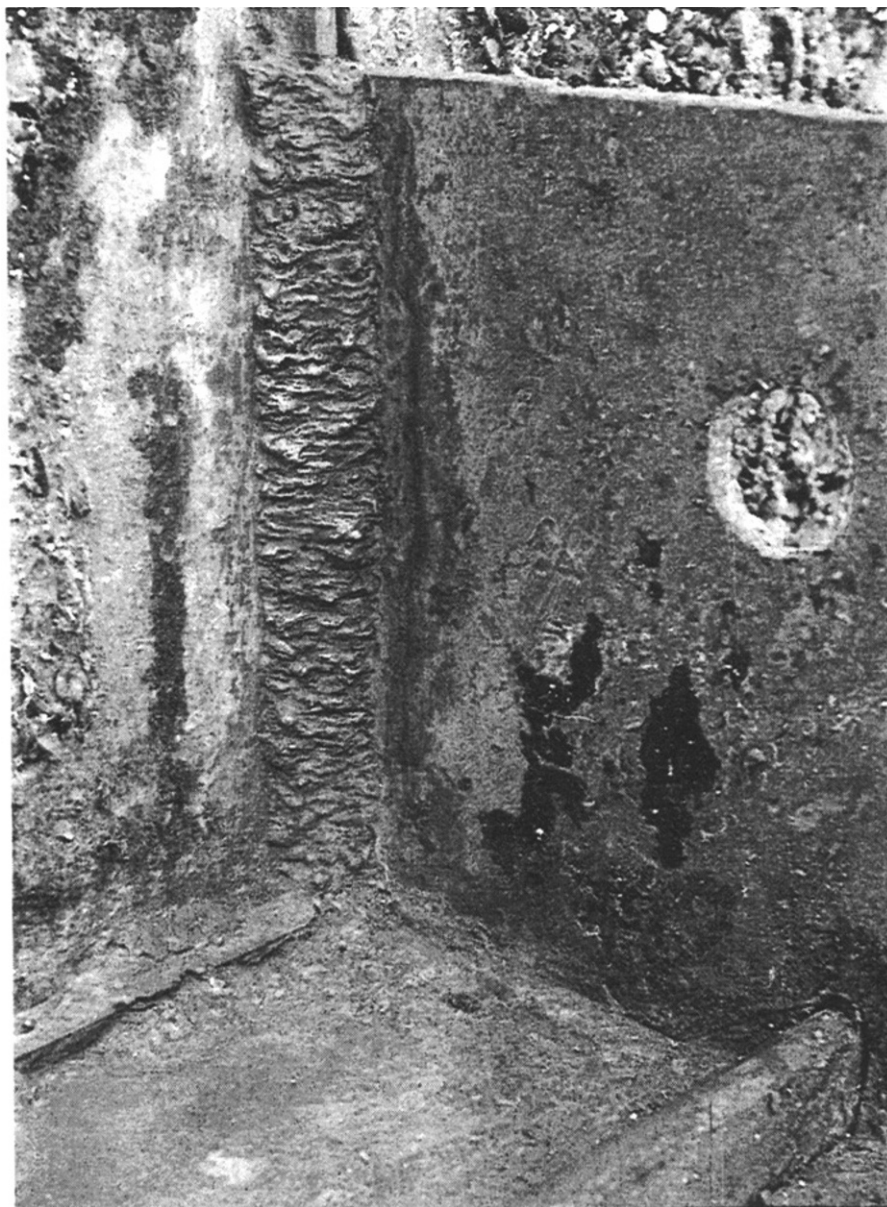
Fillet weld of ship structure element performed with flux-cored wire PPS-AN1 type in vertical position
